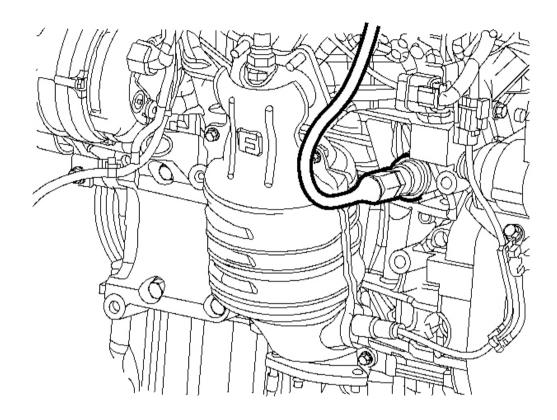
View Of Coolant Heater Power Supply Cord Courtesy of GENERAL MOTORS CORP.
